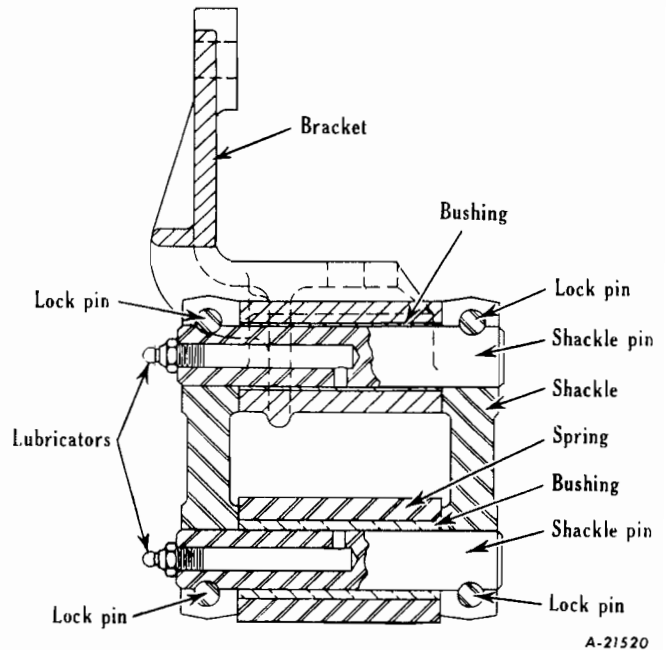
Front Spring Rear Shackle For Models L-190, L-193, L-194, L-195, LF-190, L-200, L-204, L-205, L-210, LF-210.
